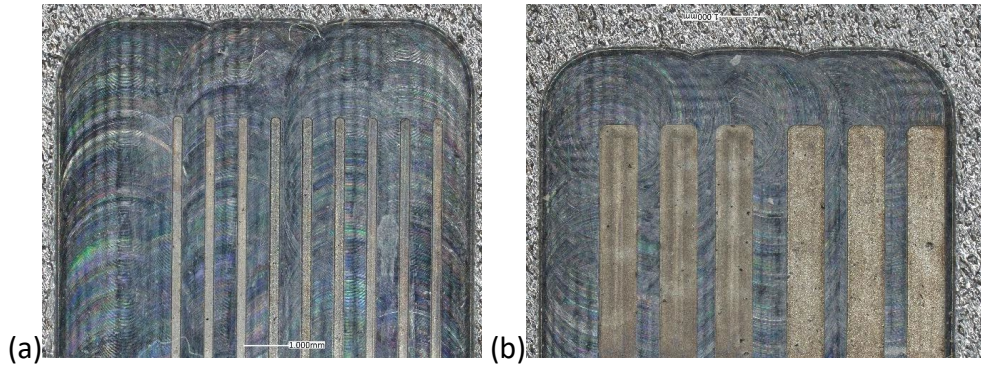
Reference image of the burrs on the machined samples with 0.2 mm (left) and 0.8 mm (right) tools.
